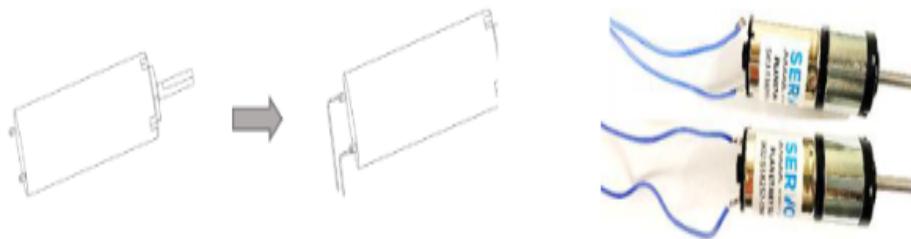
Soldered solid core wire connections to the DC motor terminals.
